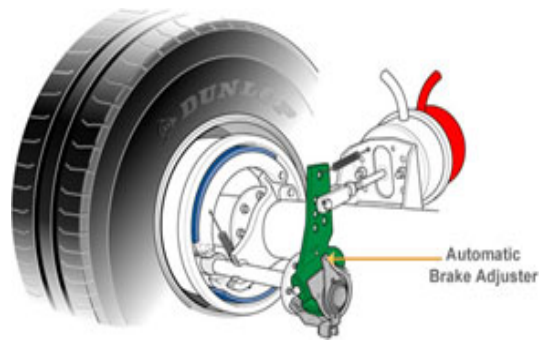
Automatic brake adjuster on a drum brake.⁶⁵
